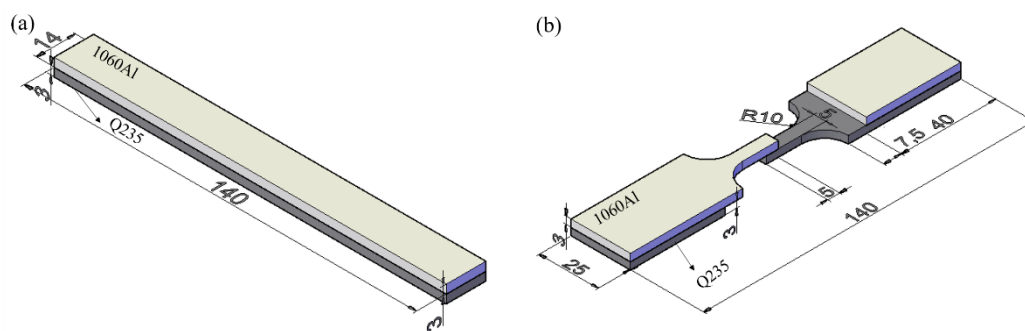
Dimensions of bending (a) and shear (b) specimen (unit: mm)
